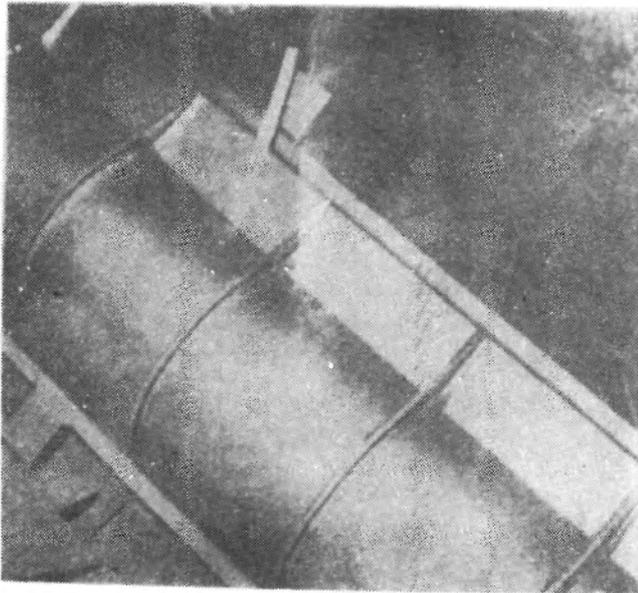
Laser welded hoist and strikedown tubes of the gun mount
